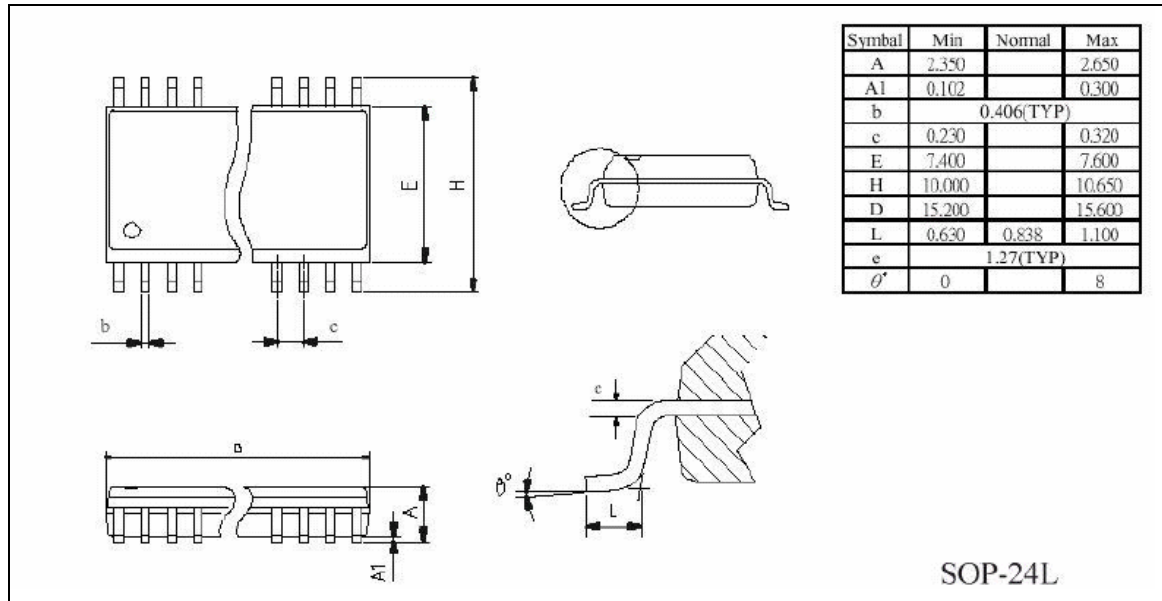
ESW5210/5211 SOP Packaging Dimensions
